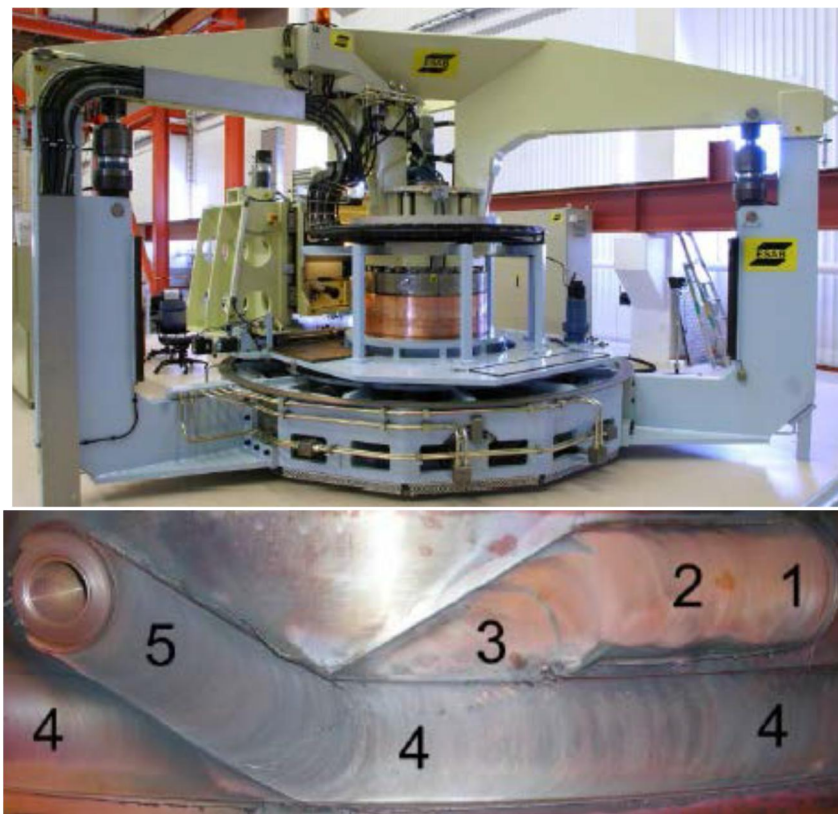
ESAB canister weld machine and weld process order. [3]
